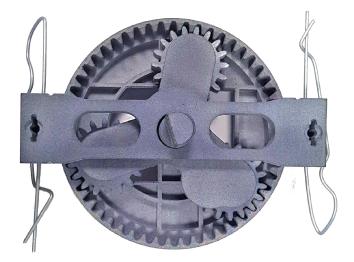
A picture of the finished product. The gearbox is made up of all the components depicted on the right side of Figure 1 plus two clips that keep the assembly together.
